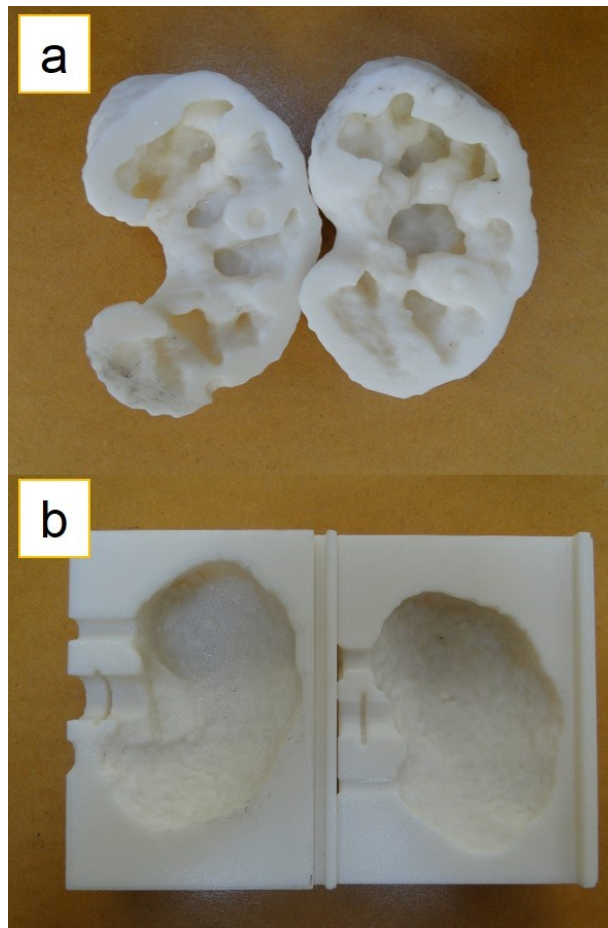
Rapid prototyped kidney moulds (a. medulla mould; b. cortex mould)
